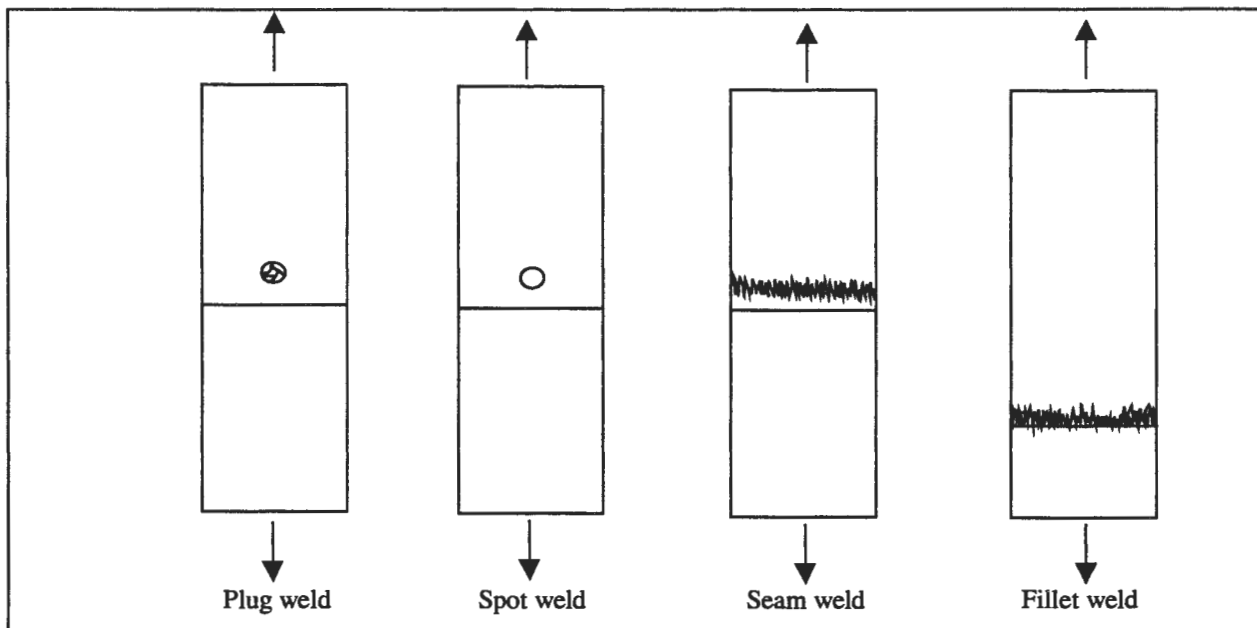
Schematic illustrating pull test direction for each type of weld specimen.
